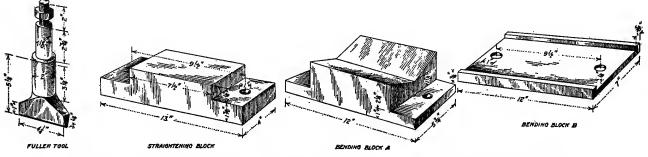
TOOLS USED FOR BENDING END AND BOTTOM-SIDE PLATES WITH POWER SHEARS EMPLOYED
